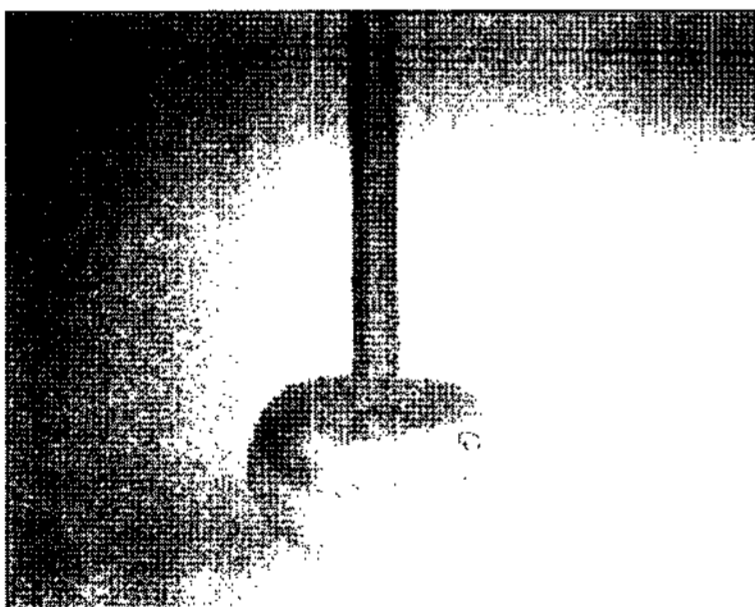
A pan cake shaped solder ball with a diameter of about 800 μm after up-setting and a punch with diameter of 150 μm.
